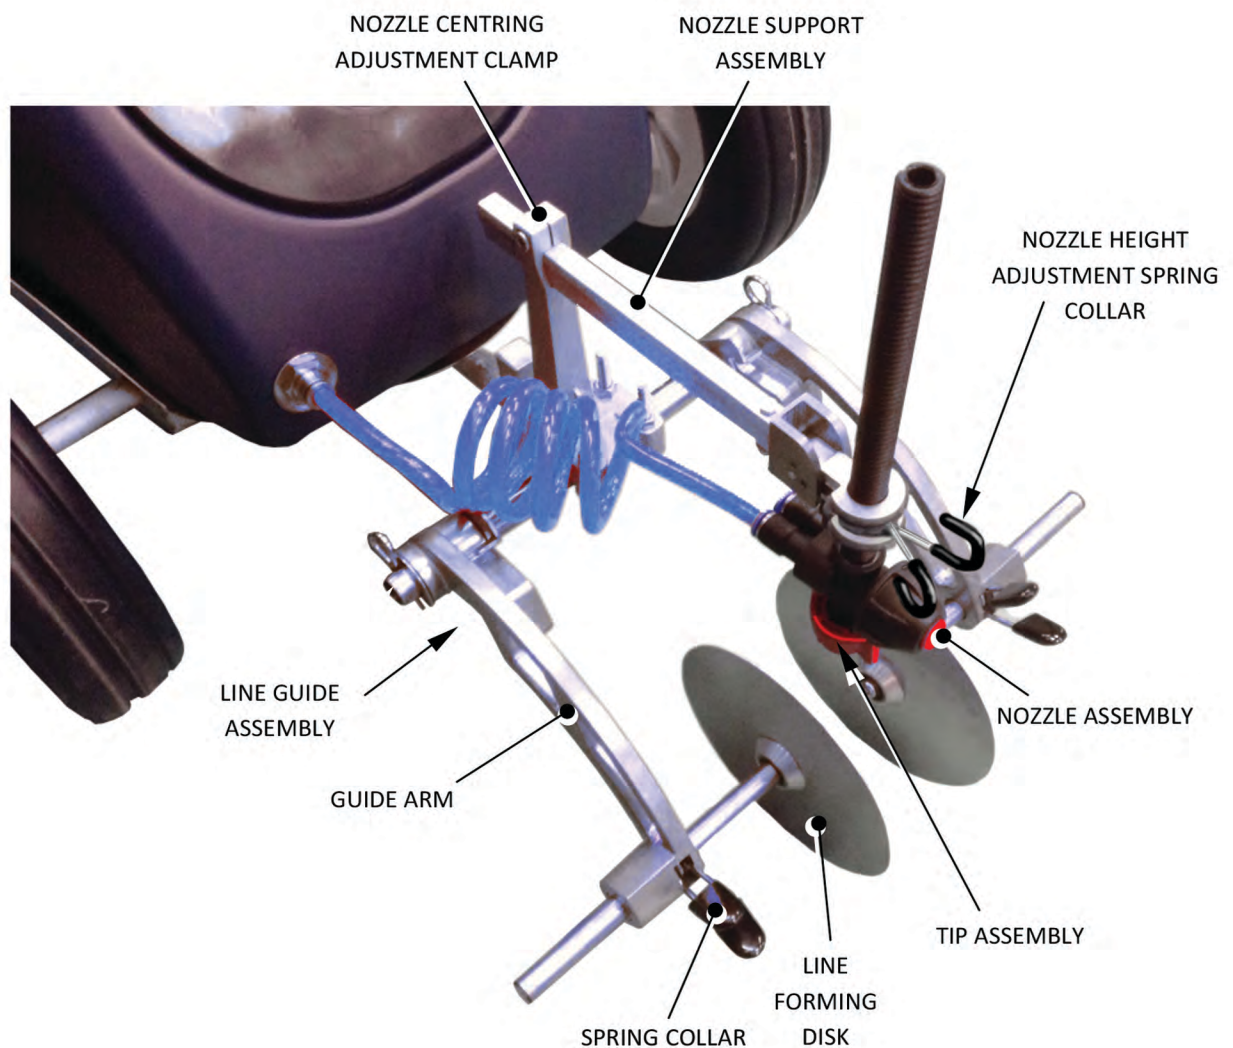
Line guide and nozzle assemblies mounted on the front of the Kombi
